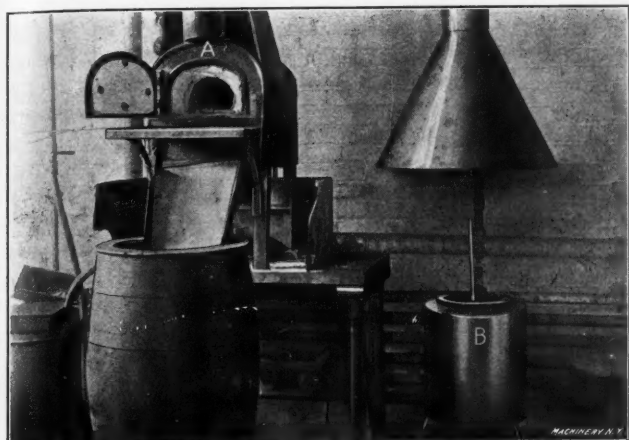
Furnace and Oil Bath in which Bearings are hardened and drawn
